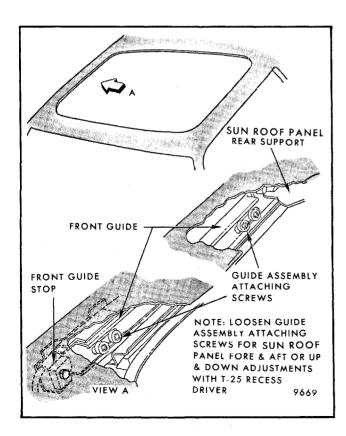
Sun Roof Panel Adjustment Provisions
